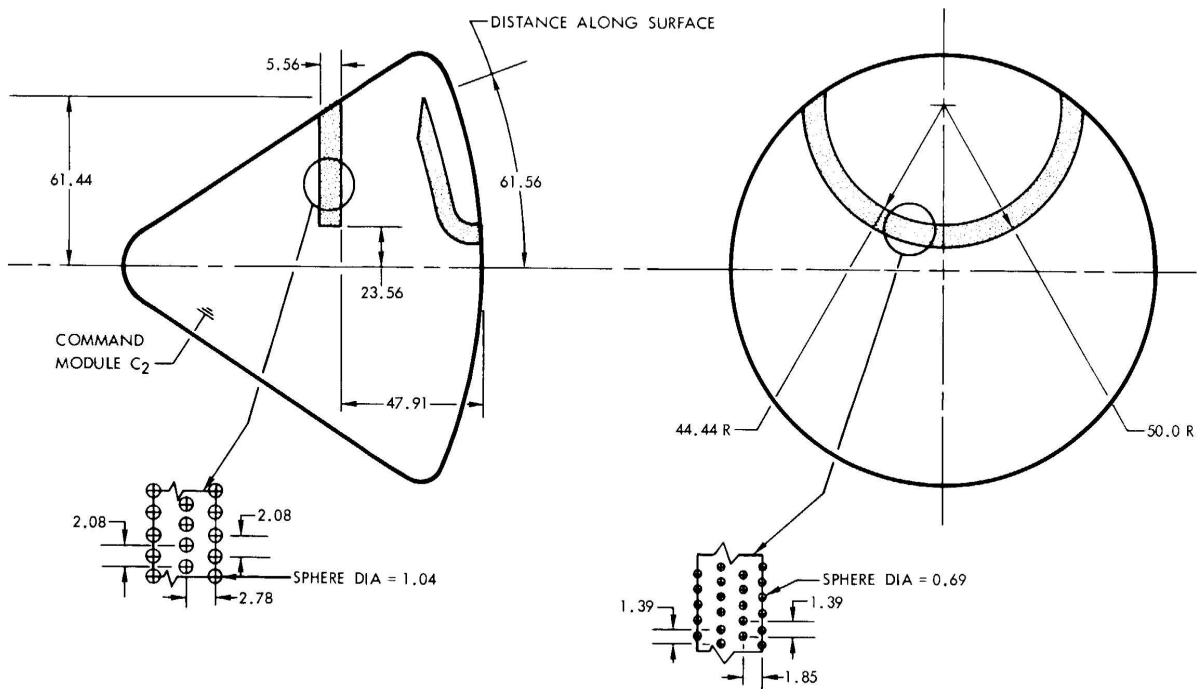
Sketch of the Apollo Command Module illustrating Boundary Layer Tripper No. 14. Full Scale Dimensions in Inches. From Ref. [39, Page 22-15]
